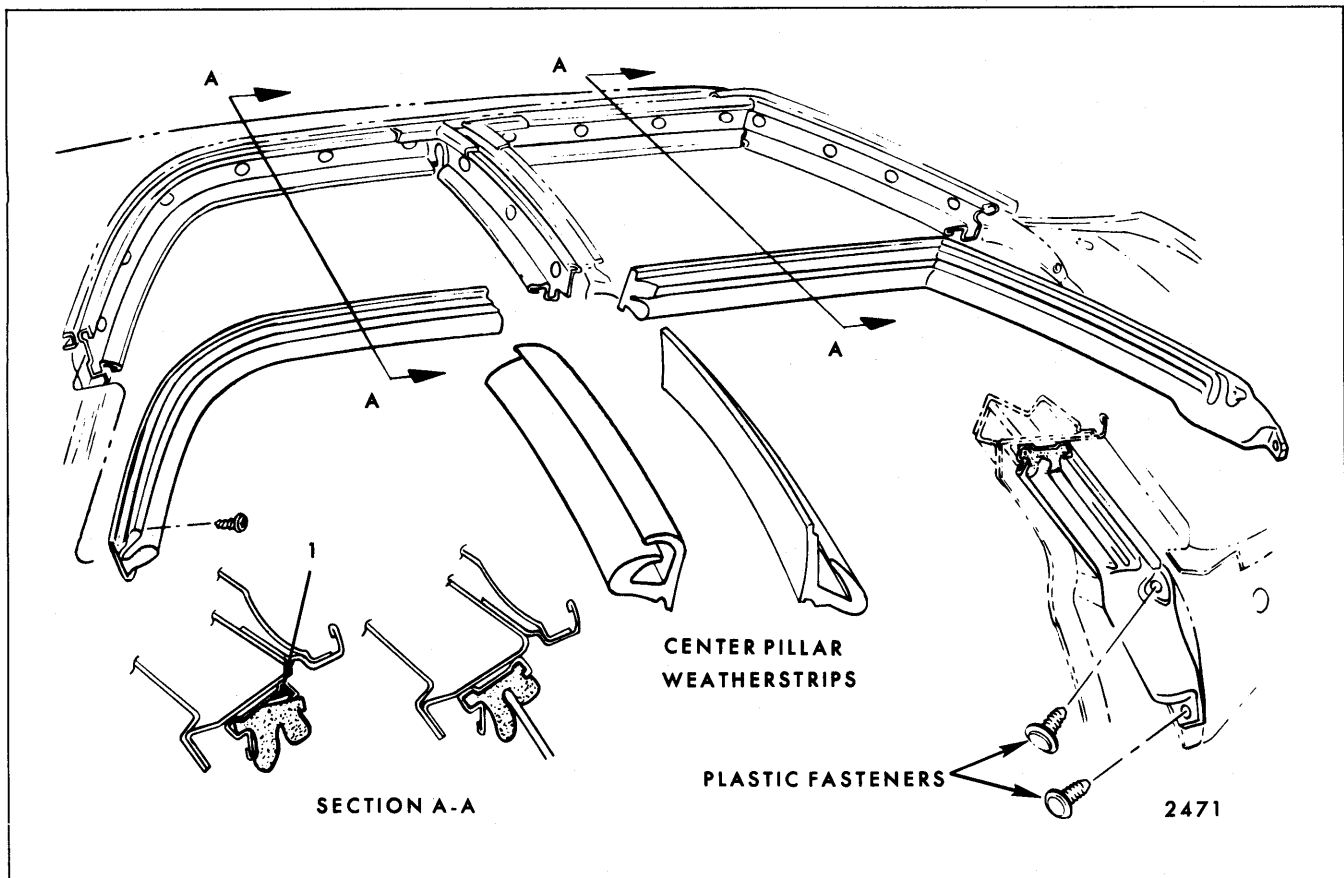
Side Roof Rail and Center Pillar Weatherstrips - "C-69" Styles
